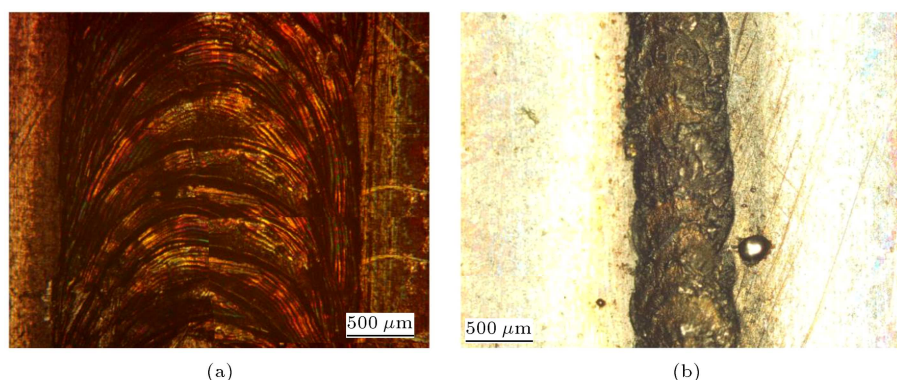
Weld appearance for the best joint: (a) Top surface and (b) bottom surface.
